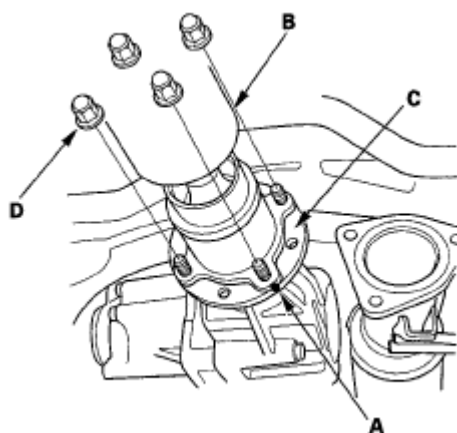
Making Match Mark On Propeller Shaft And Transfer Companion Flange
